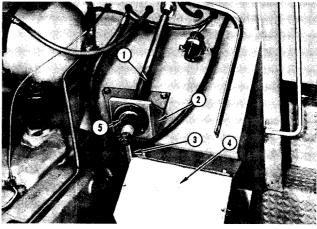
STEERING LINKAGE 1. Steering Shaft 3. Linkage 5. Bearing 2. Mounting Frame 4. Switch Box
